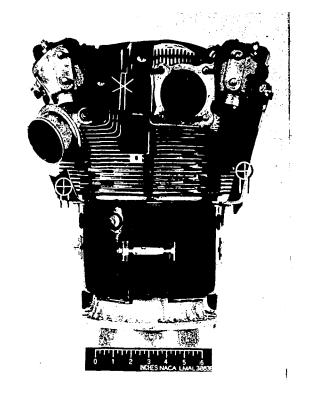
R-2600-22 engine installation in PBM-3D ground-test setup.
